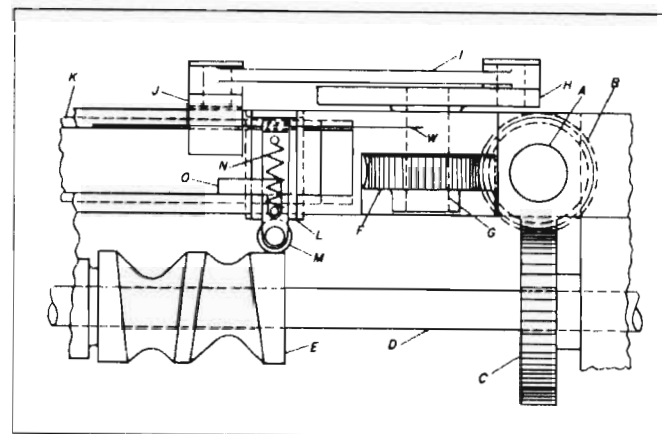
Plan view of wire-guide mechanism for a metal textile weaving machine designed to impart an intricate transverse motion pattern to wire strand W.
